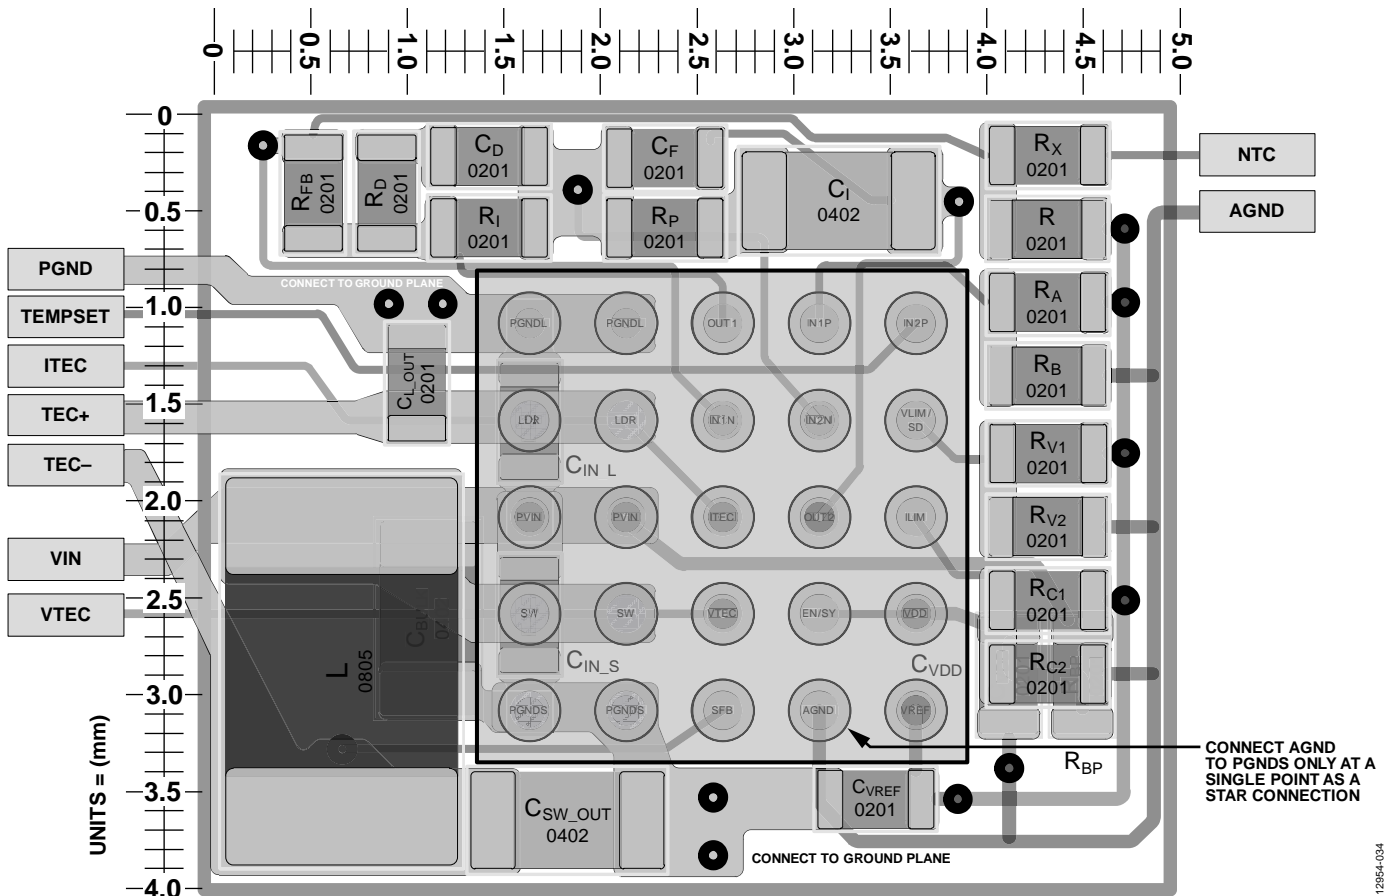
Example PCB Layout Using Two Layers (Top and Bottom Layers)
